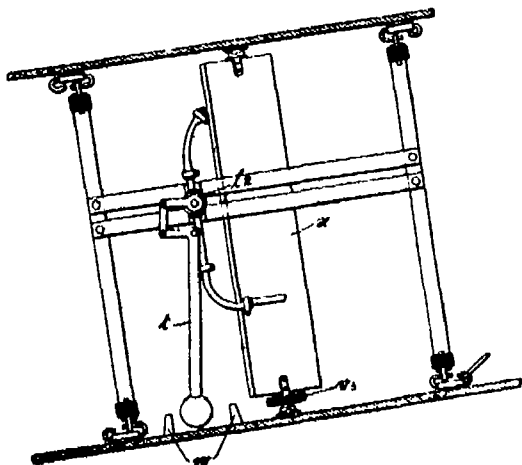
Front elevation of transverse stabilizing mechanism with pendulum
